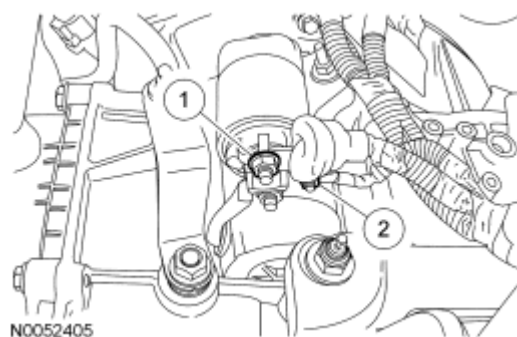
Identifying Starter Motor Wire Terminals & Nuts
